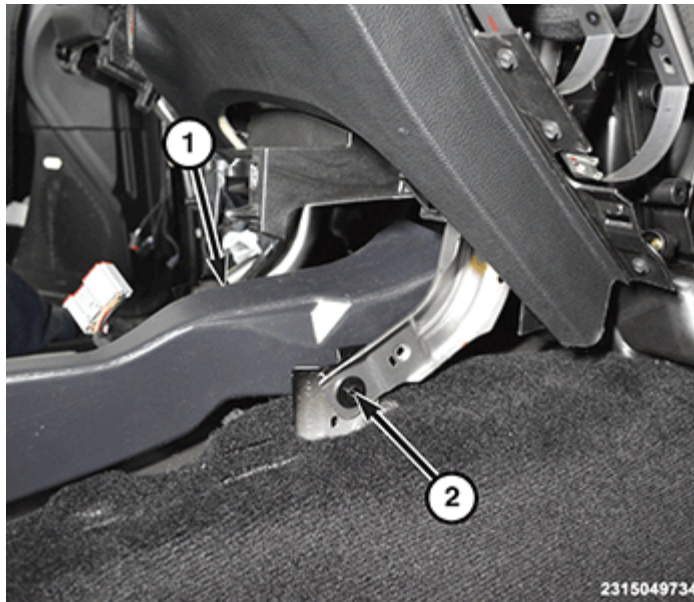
Floor Duct & Instrument Panel Center Bracket Bolt
